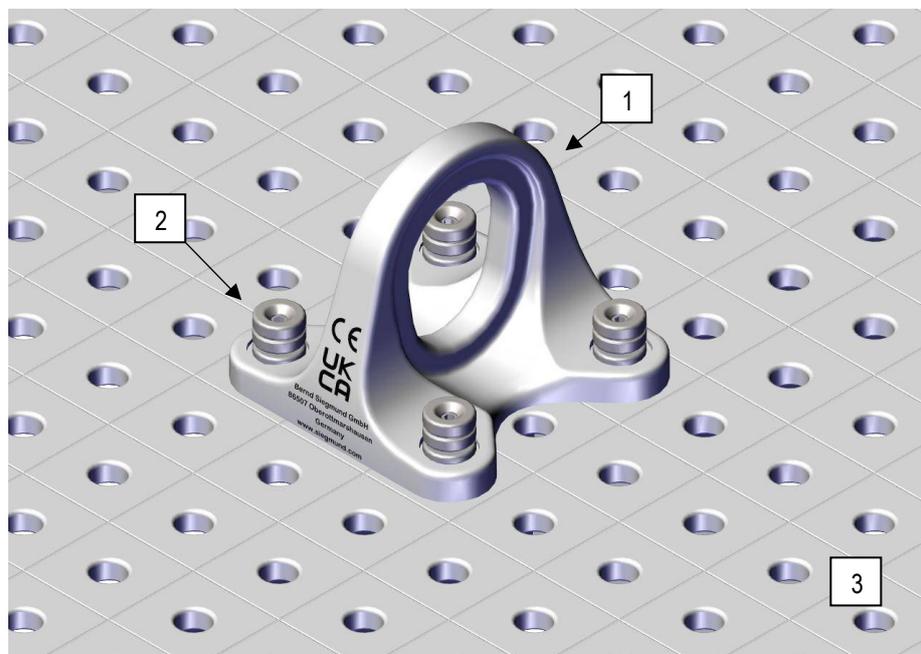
Lifting lug with ball clamping bolt on welding table
